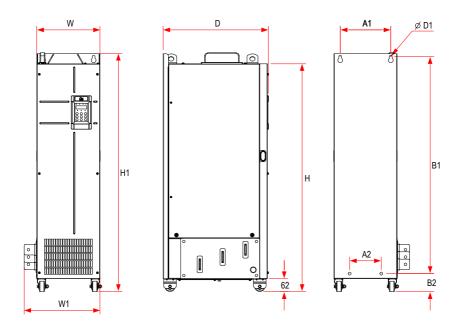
Mounting dimensions of MD500ET200G to MD500ET450G
